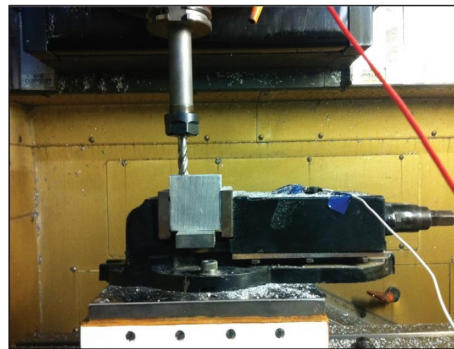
Photographic view of the machined specimen and the HSS tool.
